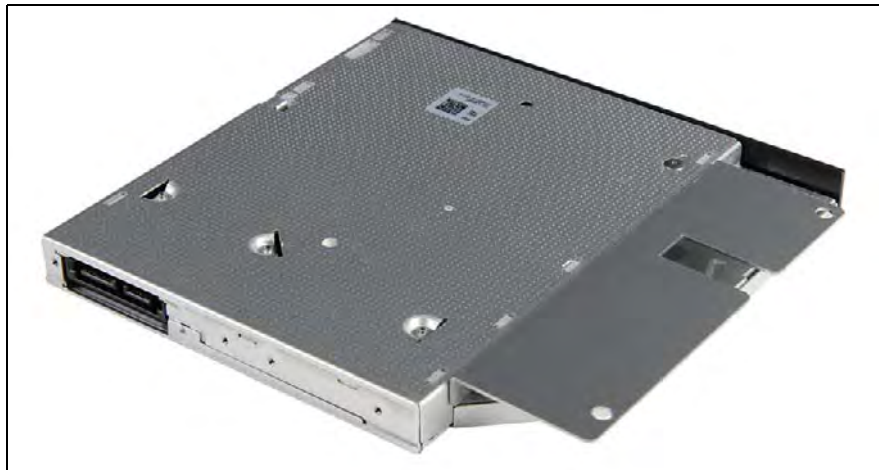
Installing the slimline ODD mounting bracket on the ODD (B)
